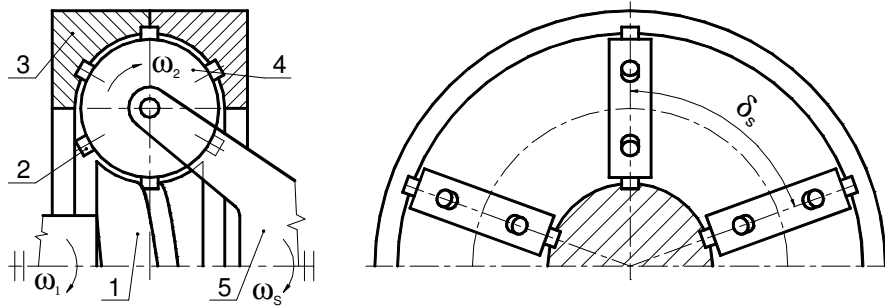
Toroidal drive 1-worm, 2-rollers, 3-stator, 4-planets, 5-carrier
